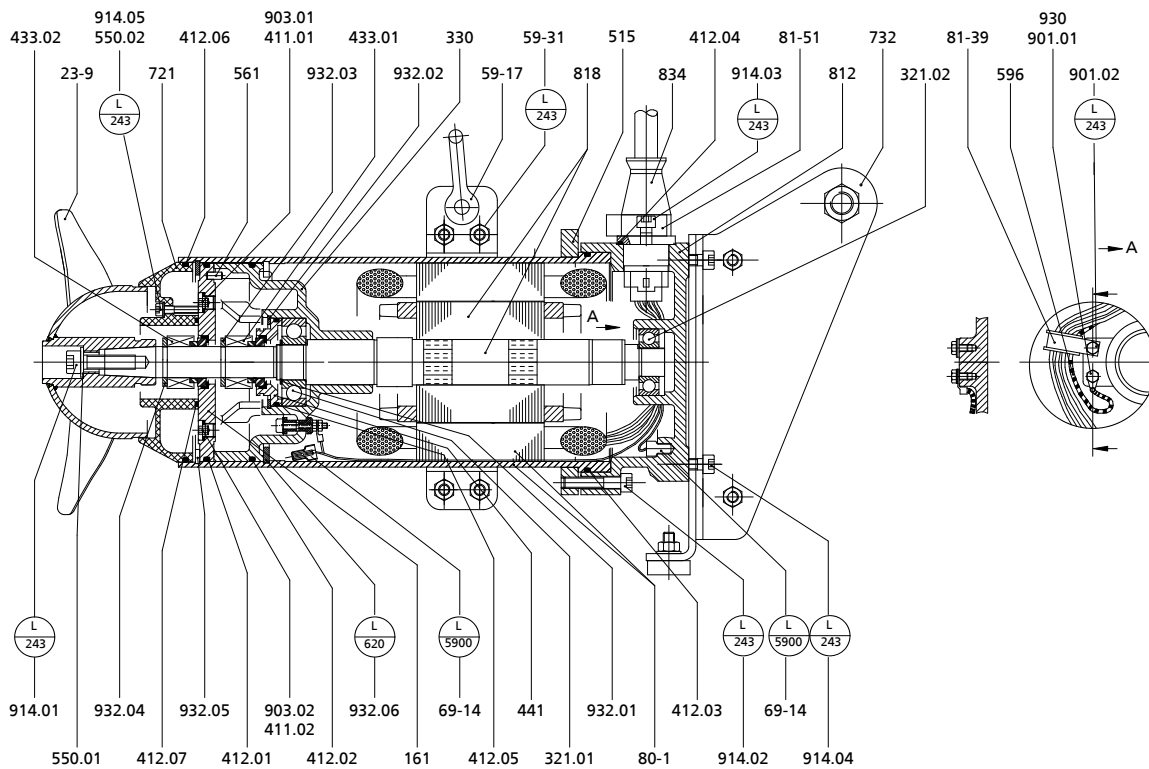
General assembly drawing of Amamix 200, motor housing material stainless steel
